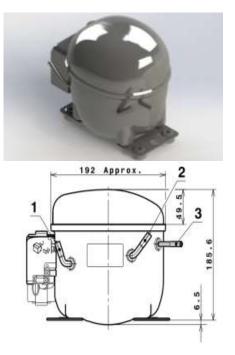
Photo of vacuum pump Source: Authors' drawing.
